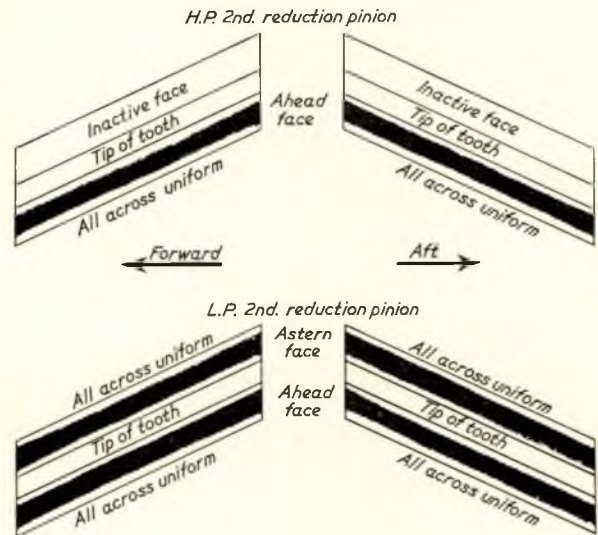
Tooth contact marking after line shaft bearing adjustment
